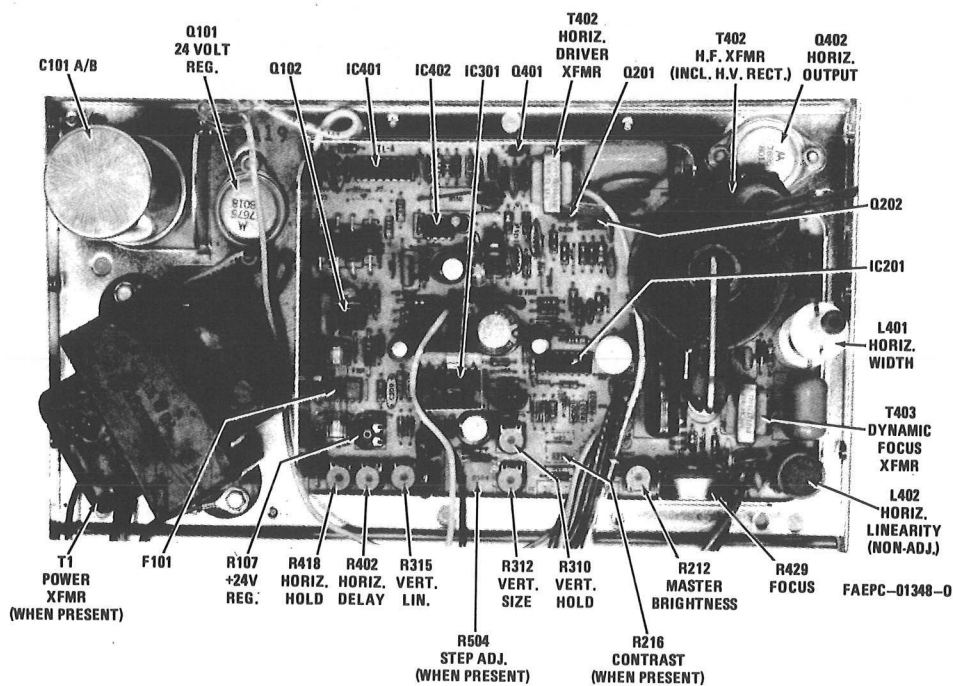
Identification and Location of Circuit Card Components - Adjustable Controls, Transistors, Integrated Circuits, Etc.
